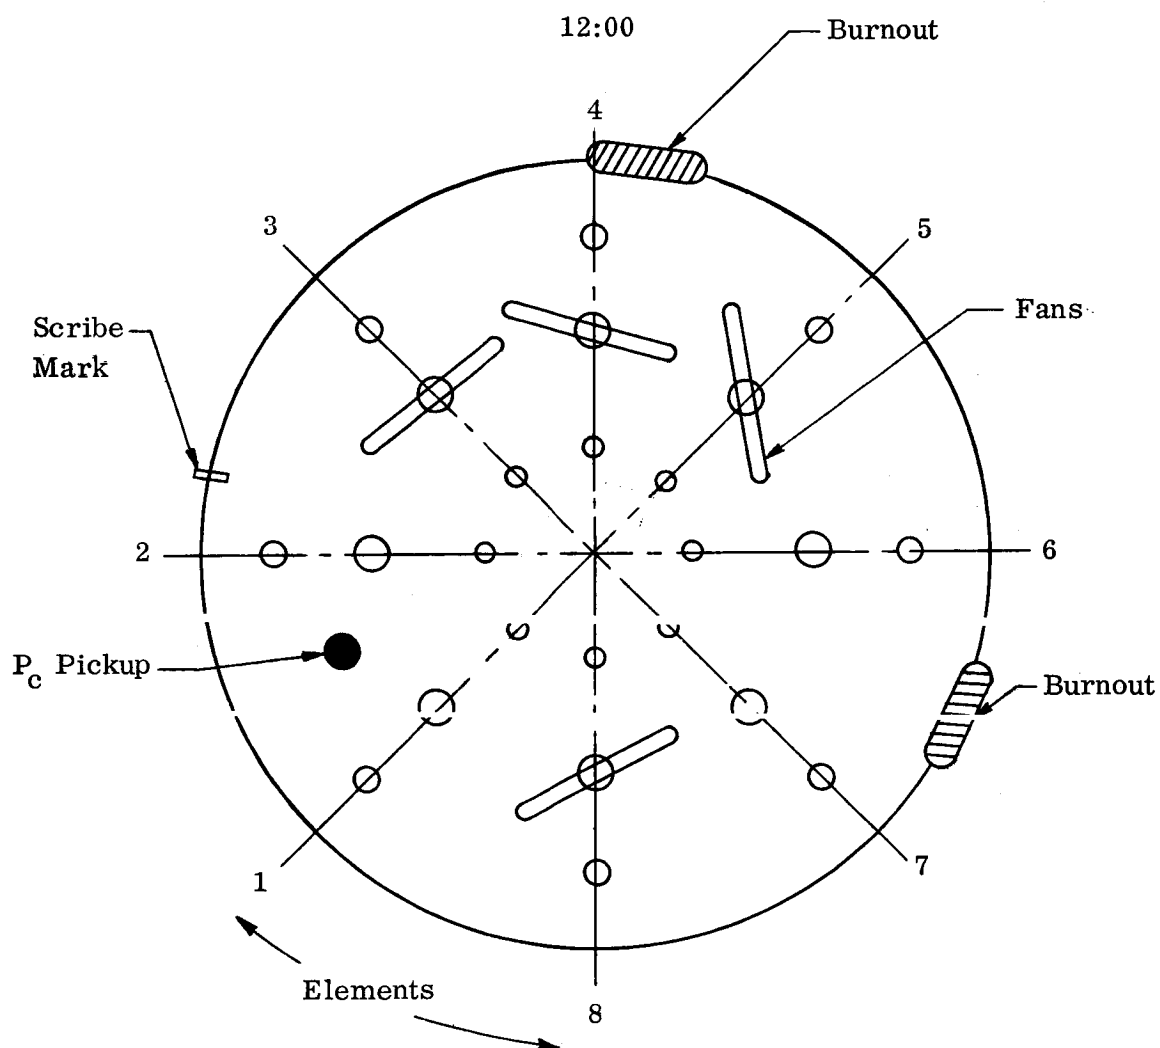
Injector S/N 1-A From Engine Assembly S/N 1
